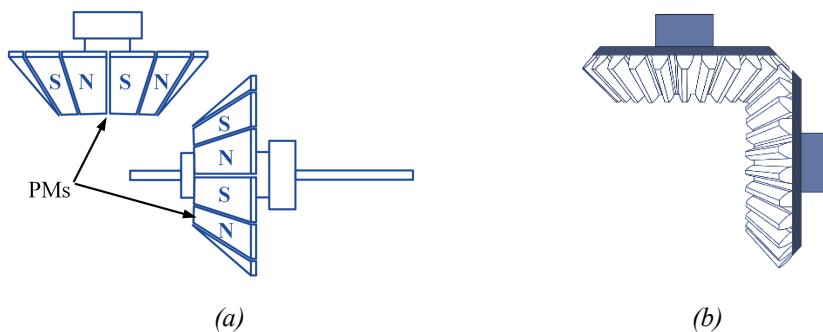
The perpendicular gears, (a) magnetic perpendicular gear, (b) mechanical counterpart.
